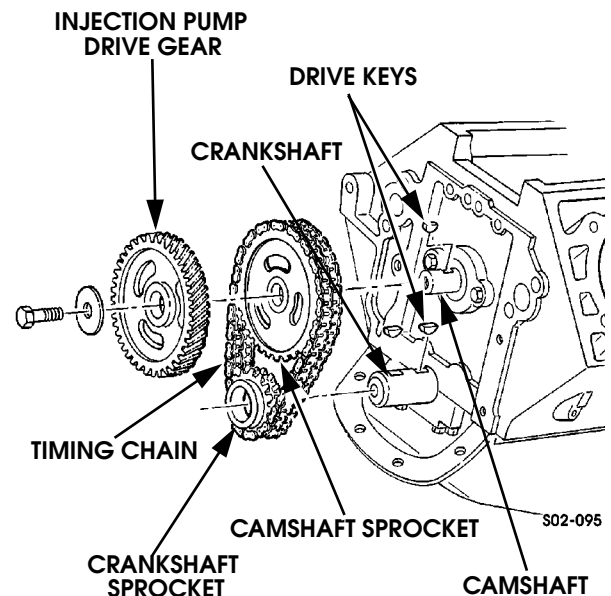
Timing Chain, Drive Sprocket, Drive Gear Removal
